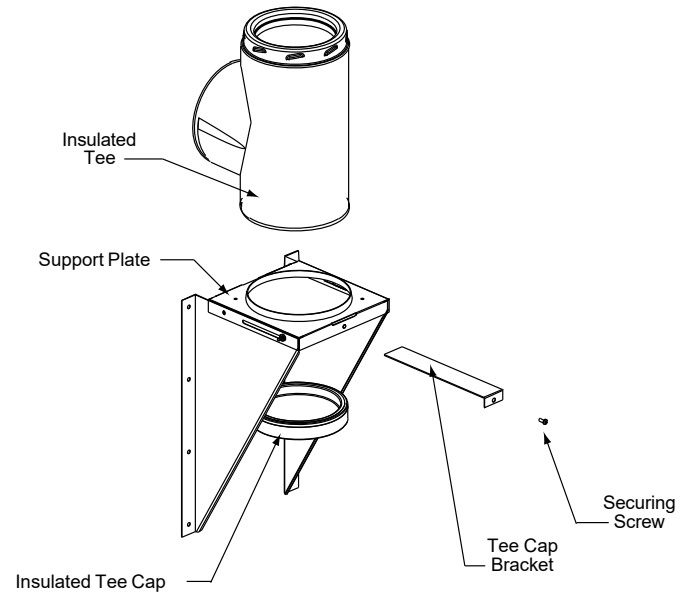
Explosion View - Wall Support, Insulated Tee and Tee Cap, Tee Cap Bracket and securing Screw.
